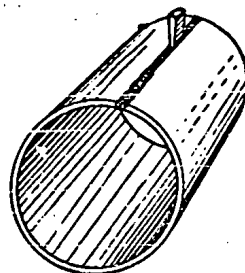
Gap adjustment in the welding of a cylinder.
